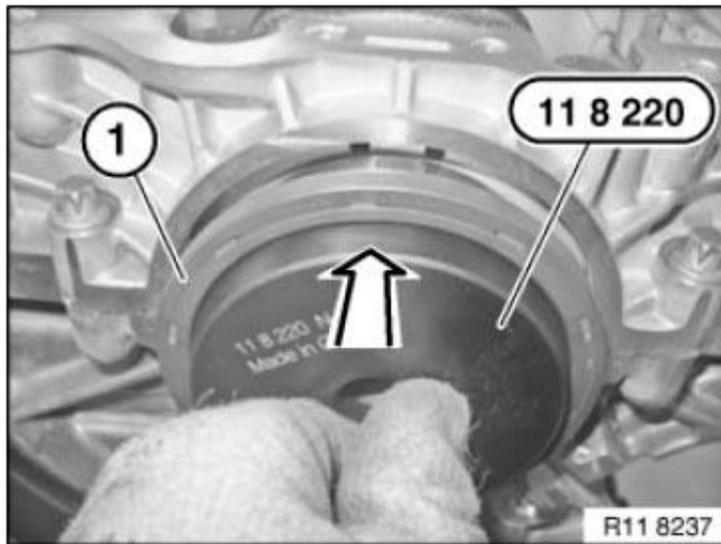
Positioning Radial Shaft Seal Using Special Tool 11 8 220 On Crankshaft
